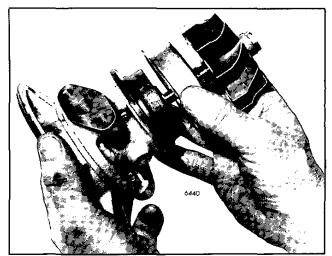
Removing Turbine Shaft Assembly from Center Housing
